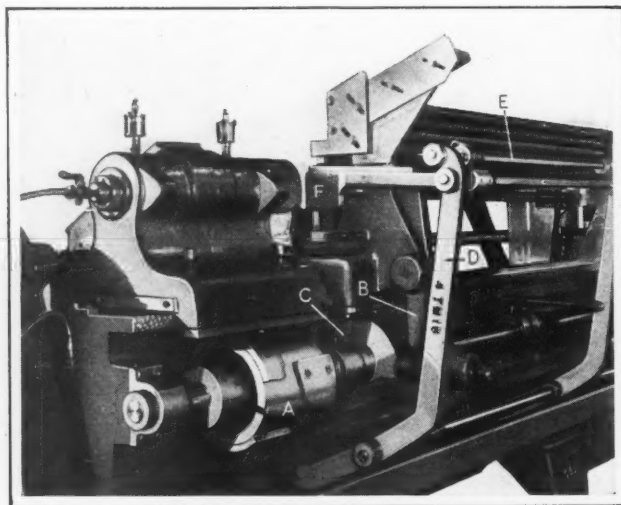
Mechanism which Actuates Each Spindle Head and the Work-feeding and Clamping Mechanism at One End of the Machine
